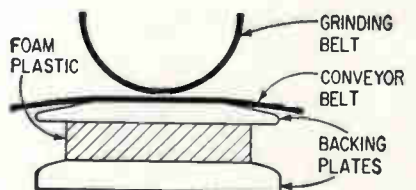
Foam plastic between backing plates enables abrasive belt to be used as belt grinder conveyor belt
